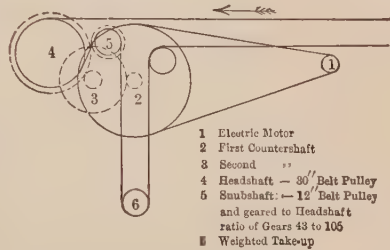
Snub-shaft Geared to Head Shaft and Acting as Second Pulley of Tandem Drive. (Lamson Company.)
